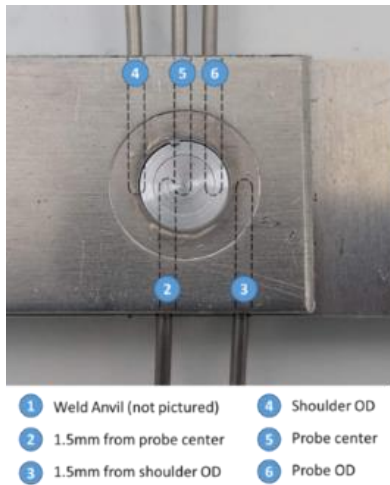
The locations of the thermocouples in the single spot weld experiments.
